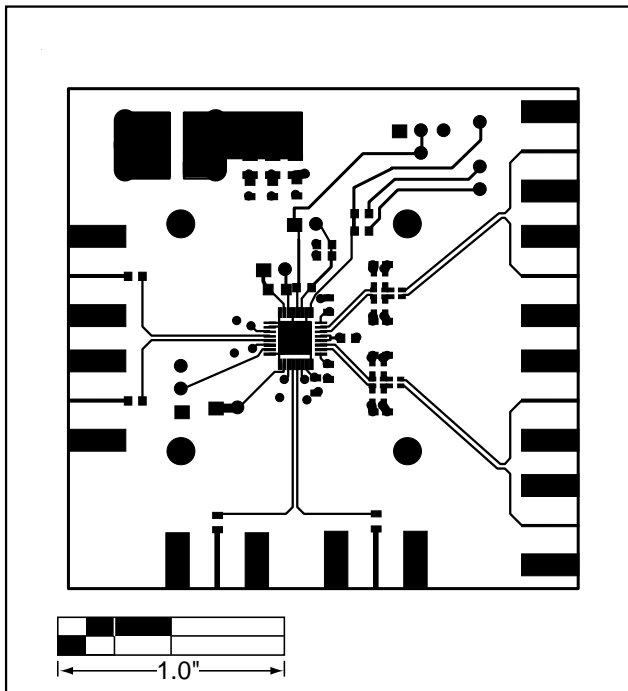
MAX3875 EV Kit PC Board Layout—Component Side
